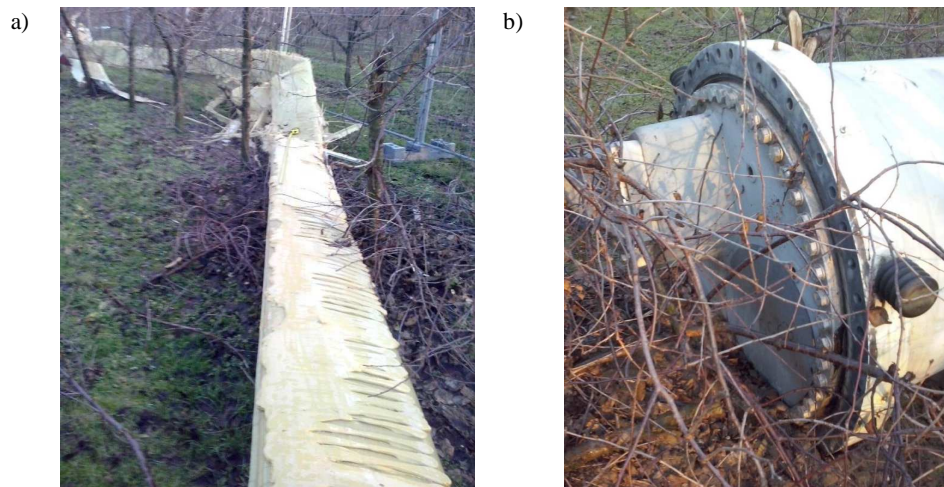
Detached blade: a) supporting beam without shells, b) bearing without bolts
